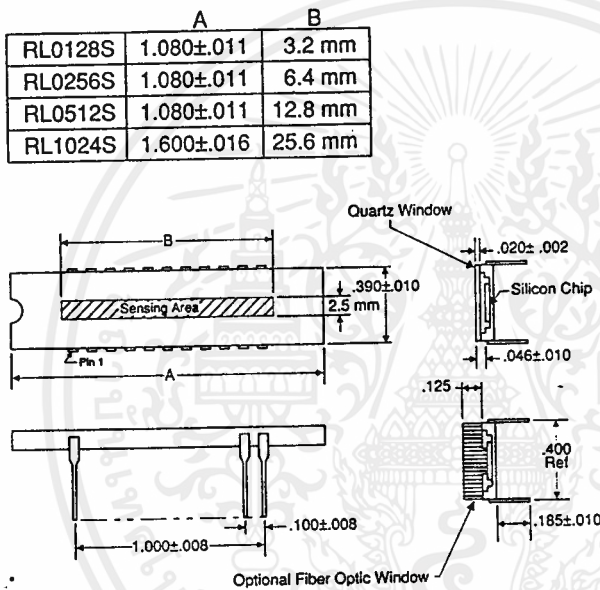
Package Dimensions. Dimensions are in Inches Except Where Millimeters (mm) are Indicated.
